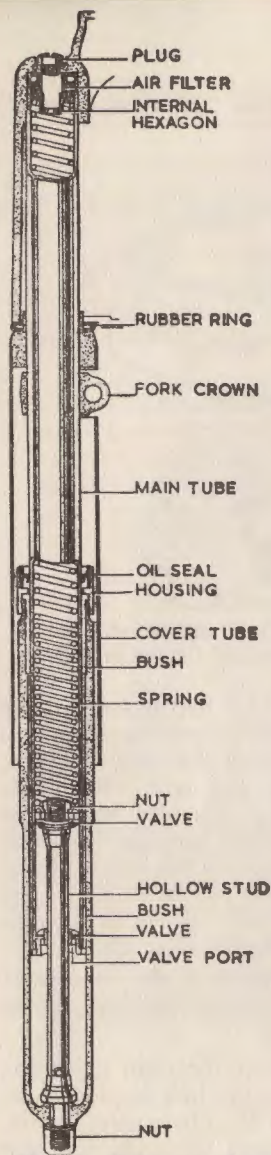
Telescopic front fork (“Constellation” and “Super Meteor”).
